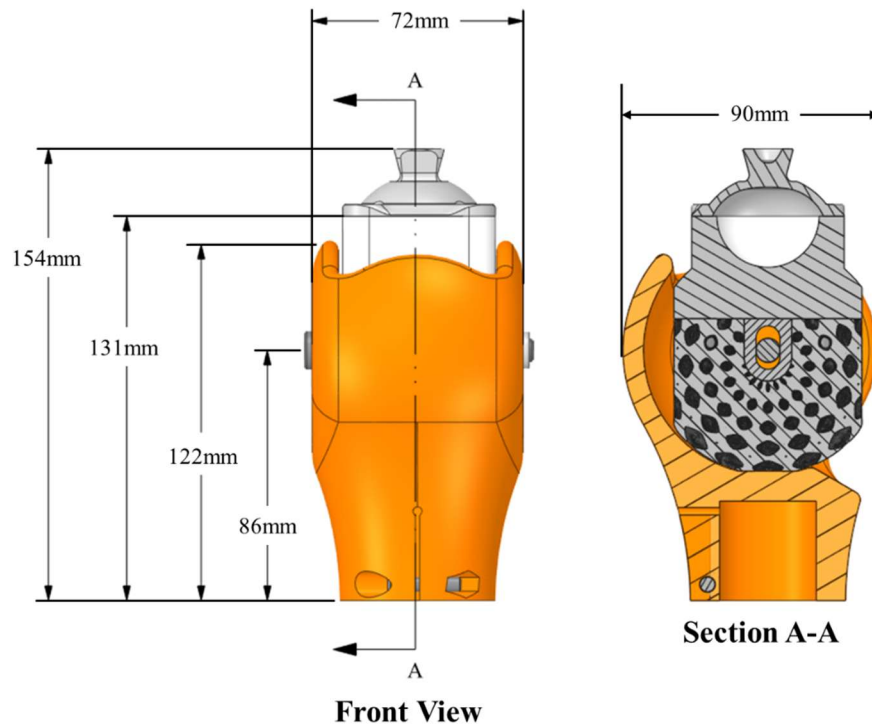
Bounding dimensions of PKJ Assembly excluding standard pyramid adapter.
